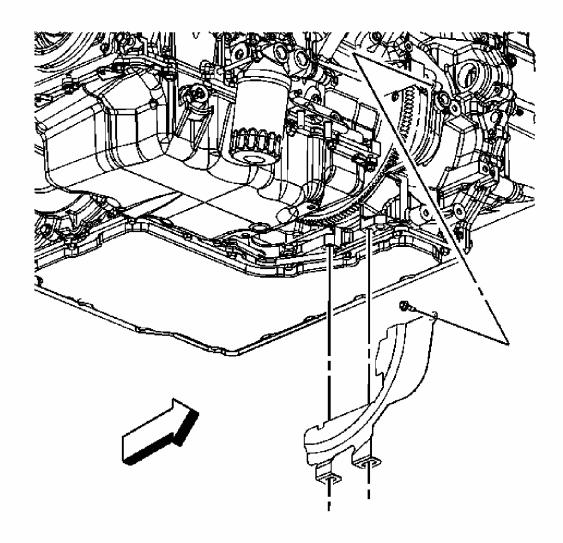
View Of Torque Converter Cover Courtesy of GENERAL MOTORS CORP.
